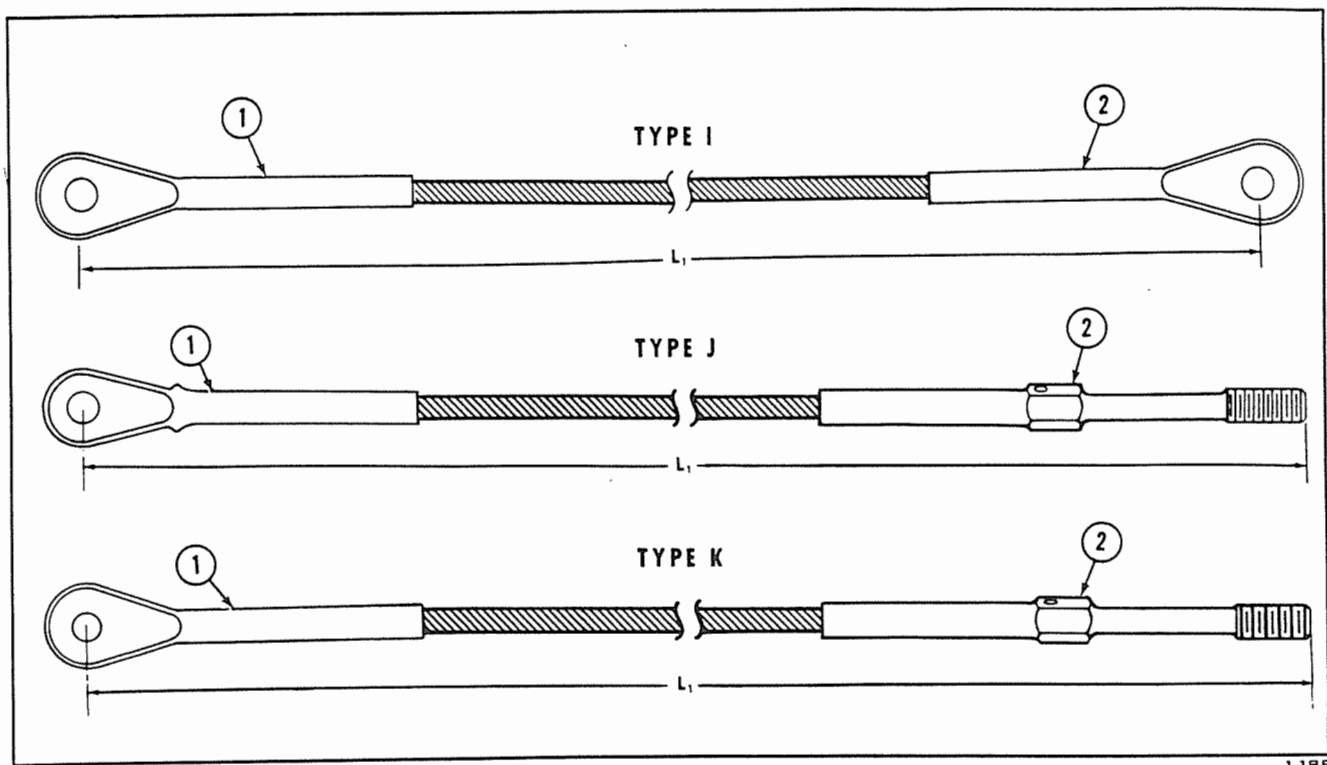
(Sheet 7 of 7 Sheets). Aileron and Aileron Geared Tab Control System – Cable Assemblies
